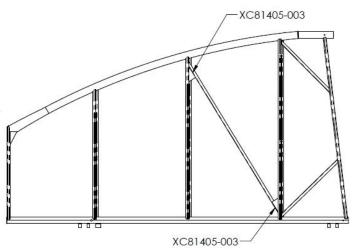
Gussets at Center Channel Brace (Left Horizontal Stabilizer, Looking Down)
